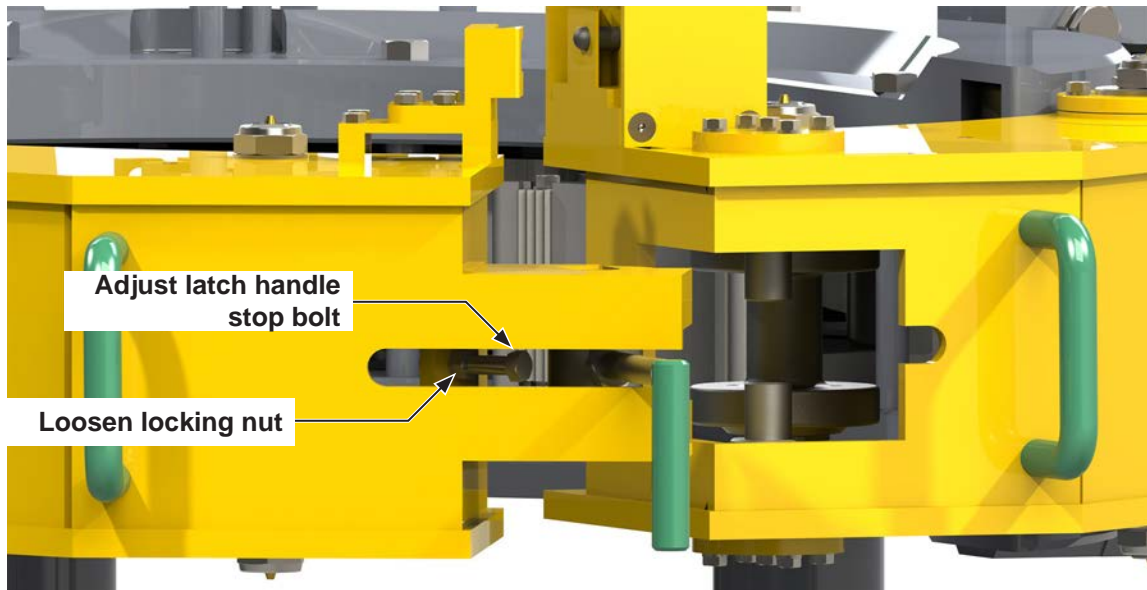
Latch Handle Stop Adjustment 01
